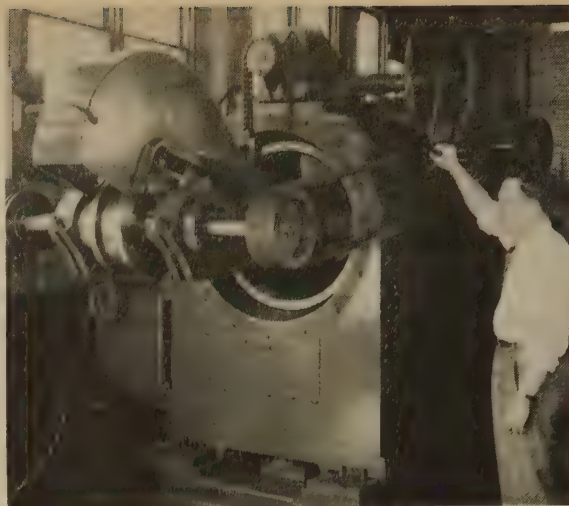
Close-up of the heart of the machine, showing, in the foreground, with but one set of drive belts attached, the shaft that drives the grinding wheel. The wheel hood cover, raised, is in the center, showing the wheel mounting flange.
